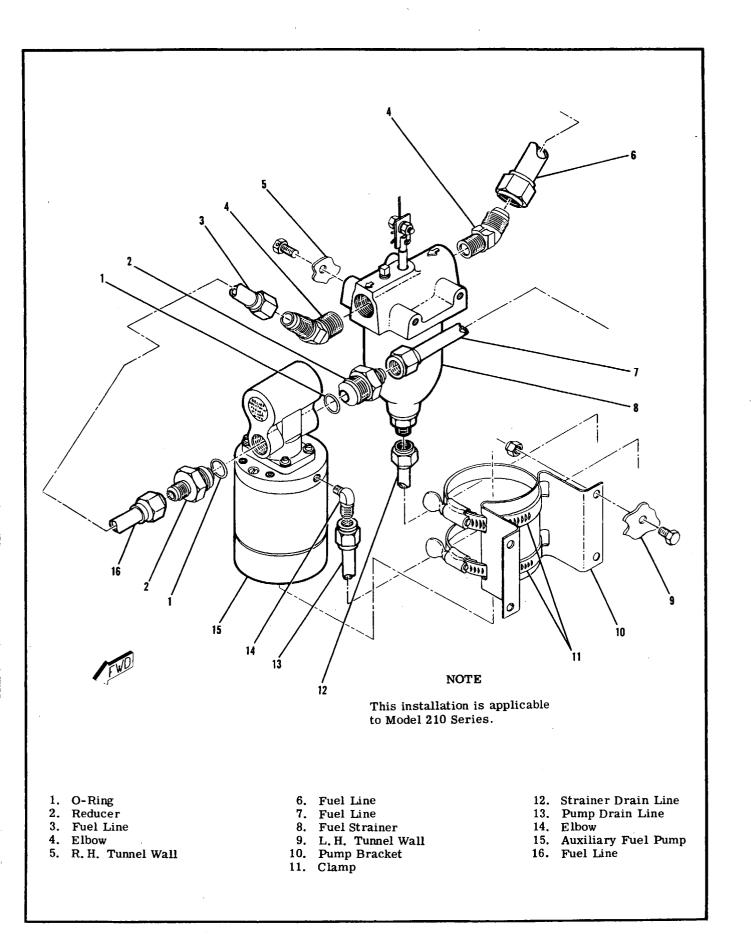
Electric Fuel Pump and Strainer (Sheet 1 of 3)
